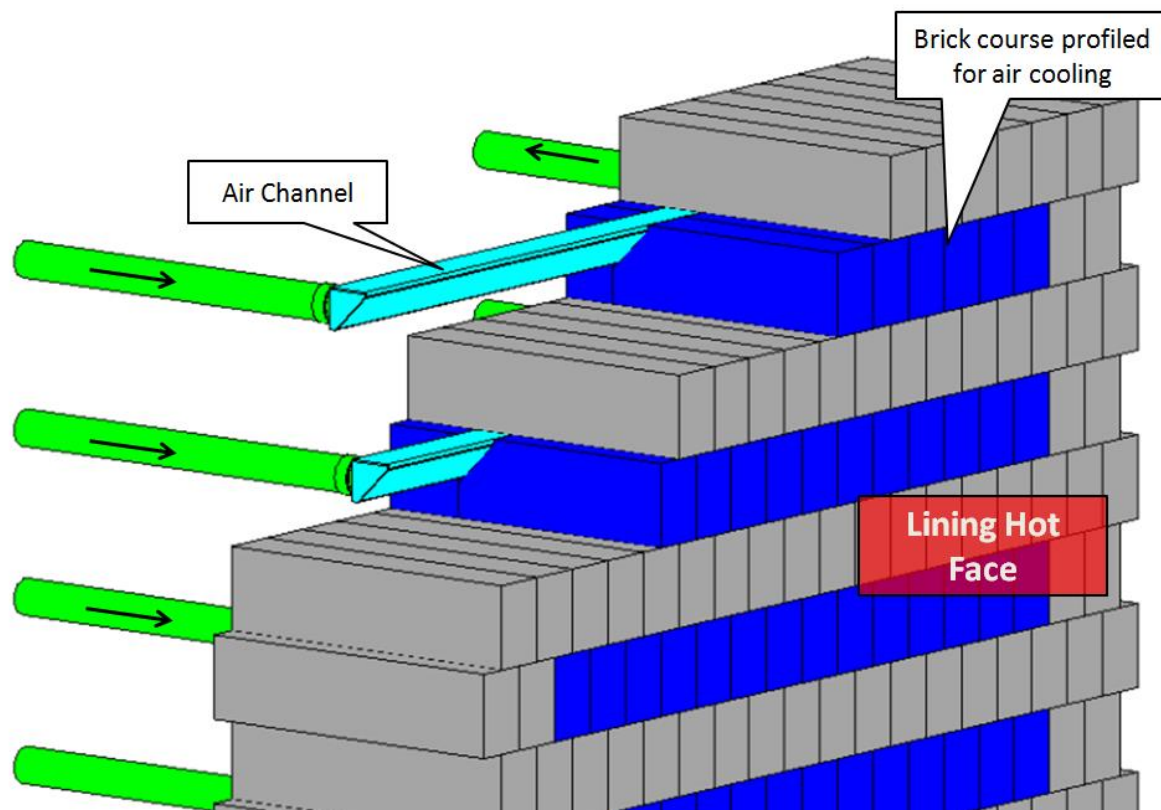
Partial assembly of Internal Air Cooling channels within refractory wall
